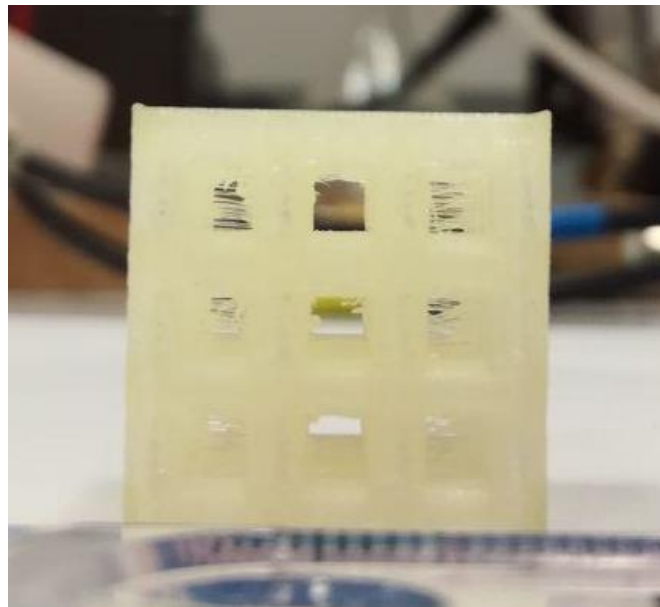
Geometry G3 printed with PVA. Frontal view.
